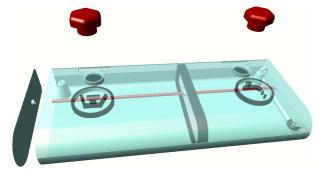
Exploded view of the tank. The separator and the inlet/outlet ducts are evident.
